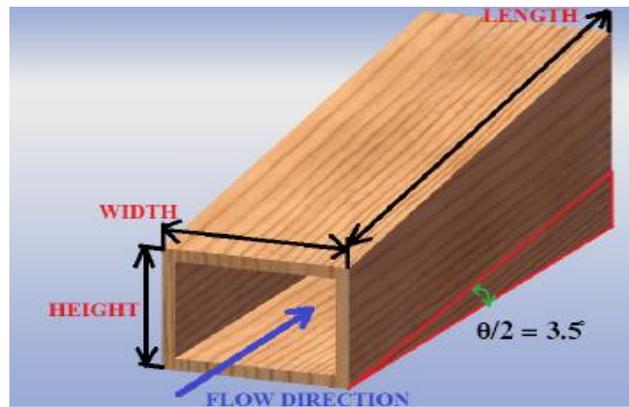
Dimetric View of The Diffuser developed using Solid-Works.
